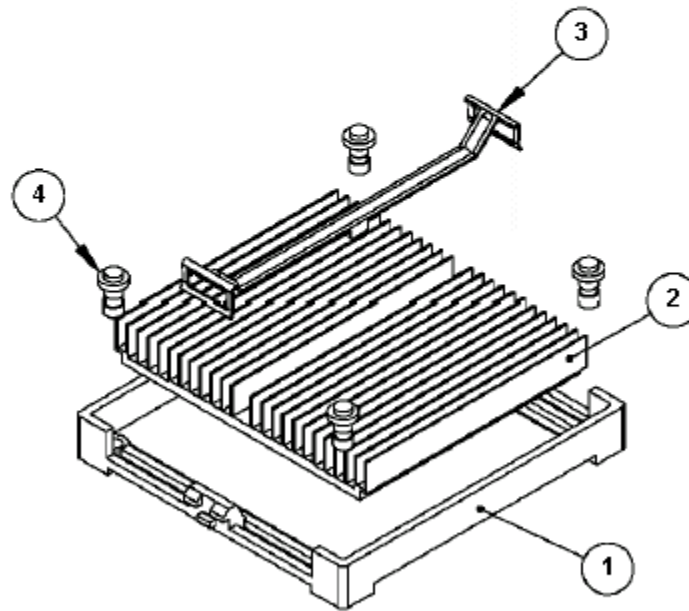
Exploded Views (1) of a Heat Sink Attachment using a Plastic Force
